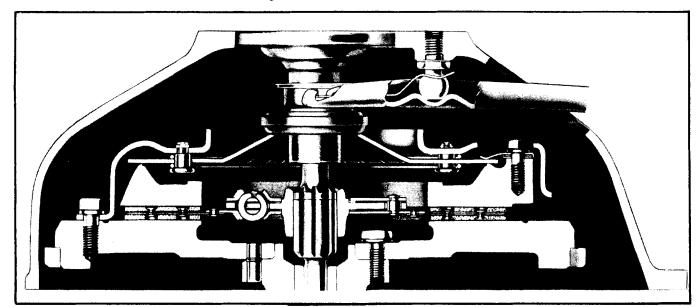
Cross Section of Typical Bent-Finger Clutch
